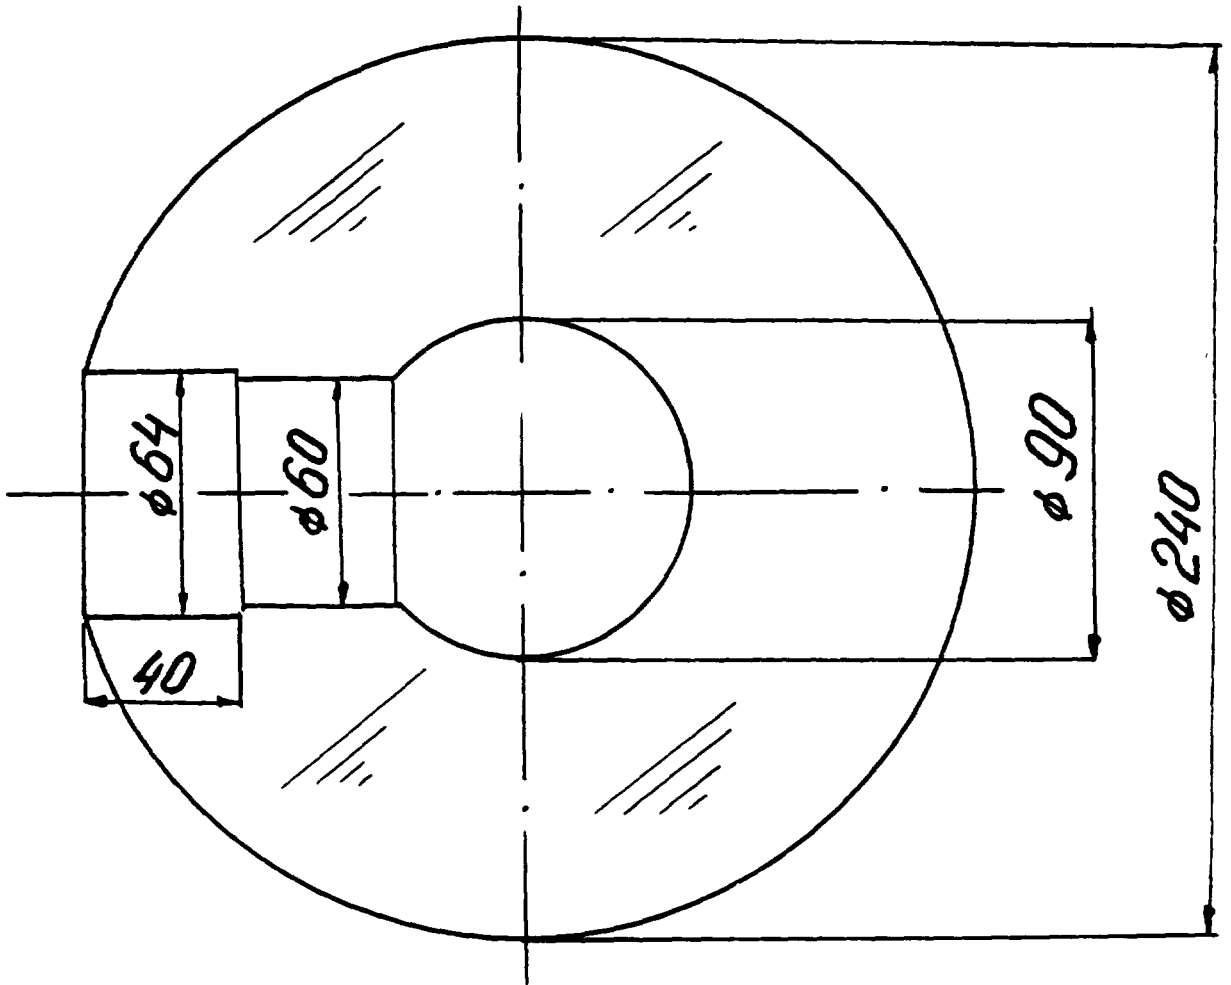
Geometry of Fe assembly (sizes are given in millimeters).
